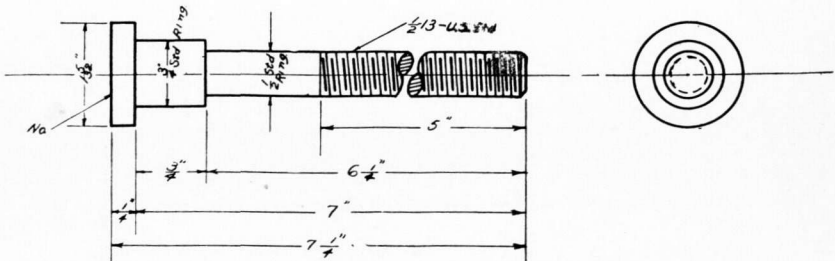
Brake guide rod. $1\frac{1}{8}$ -inch Rd. No. 1 O. H. steel
